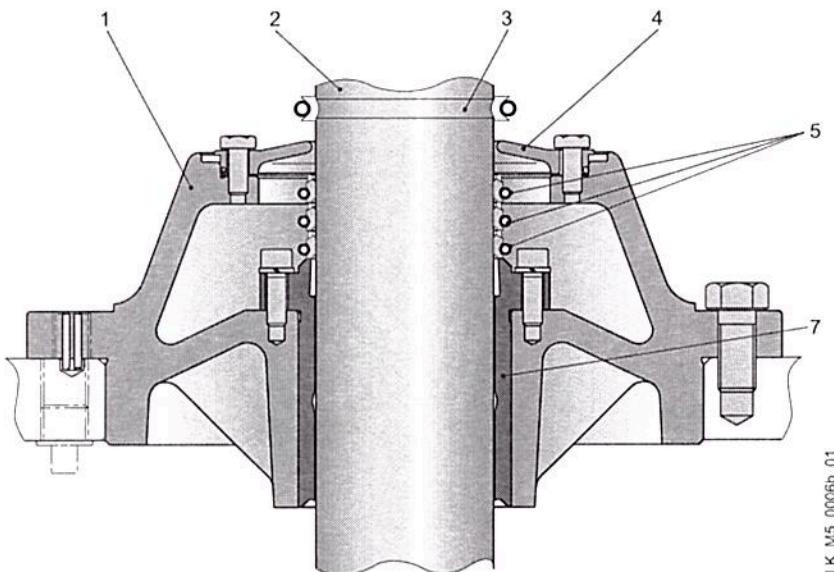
Typical view of a guide bearing without cooling and with open design
